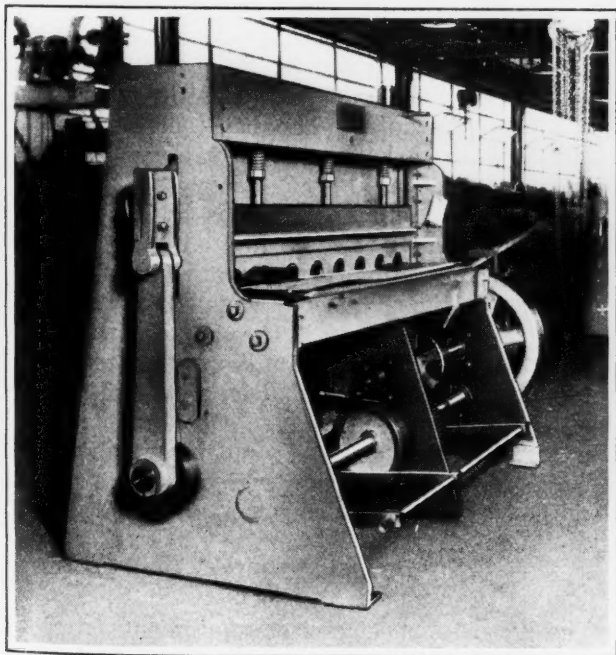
Power Squaring Shear Fabricated from Parts Cut to Shape by Machine Shown in Heading Illustration
